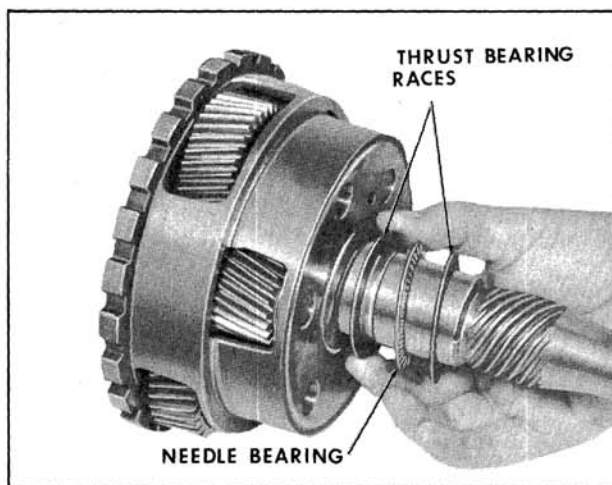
Removing Planetary Gear Thrust Bearing
